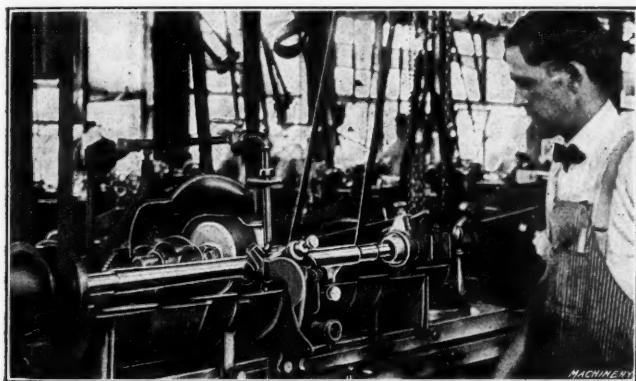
Finishing Steel Shafts in a Brown & Sharpe Universal Grinder
